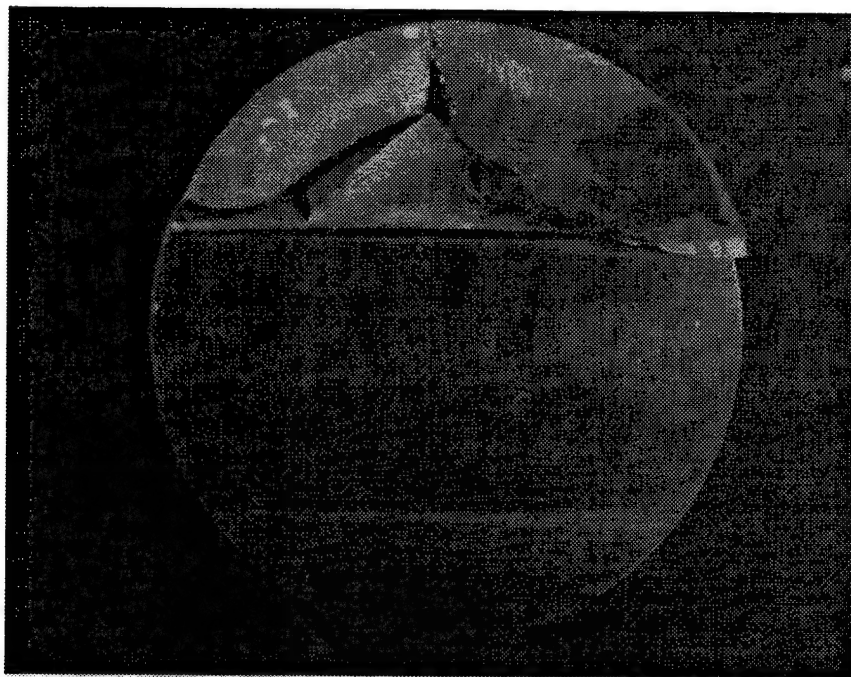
The compression split ball of specimen 49 shows the approximate 2 mm crack arrest depth with thin foil remnants of the cooled liquid metal attached to the fracture surface. The 2 mm crack arrest depth was found on several compression split balls.
